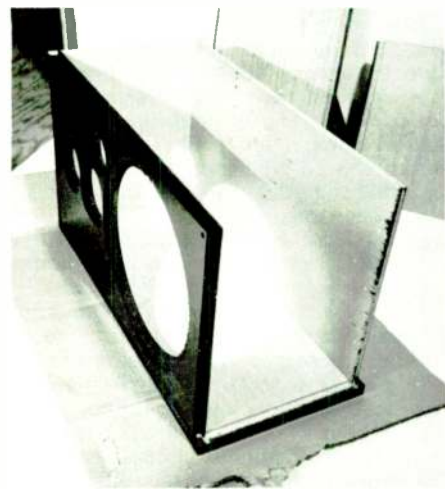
View of the partly assembled cabinet before the bottom and final side are glued in place.
